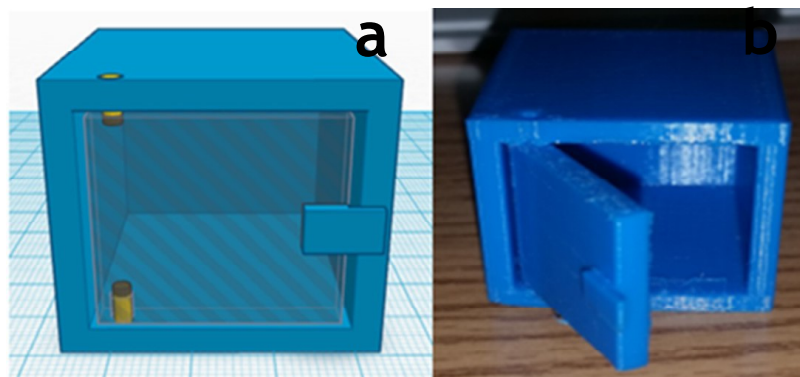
Box with movable doors (a) CAD design and (b) prototype.
